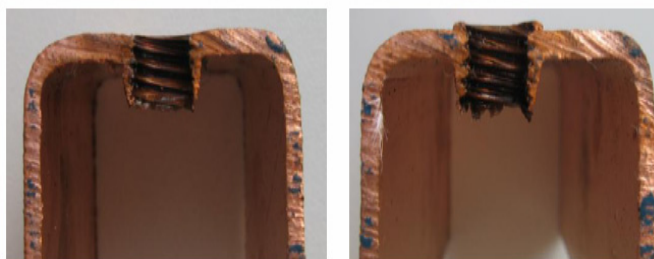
a) The forming threads in bushing. b) The forming threads in bushing with collar
